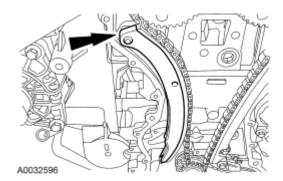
Locating RH Timing Chain Guide Courtesy of FORD MOTOR CO.
